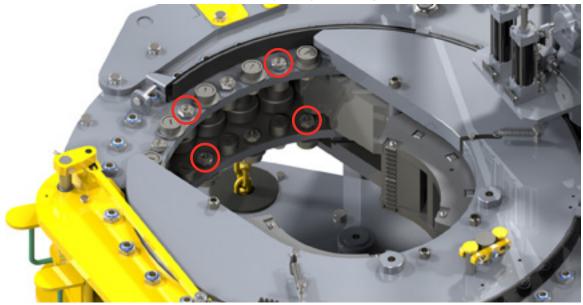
Cage Plate Cam Follower Lubrication
